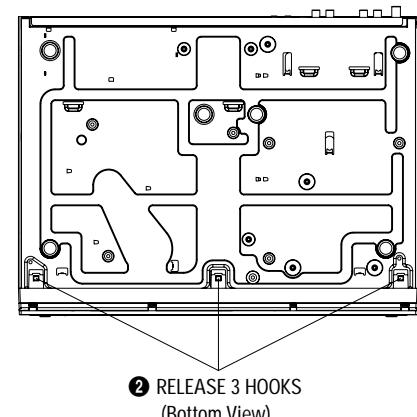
Ass'y Front Panel Removal(Bottom View)
